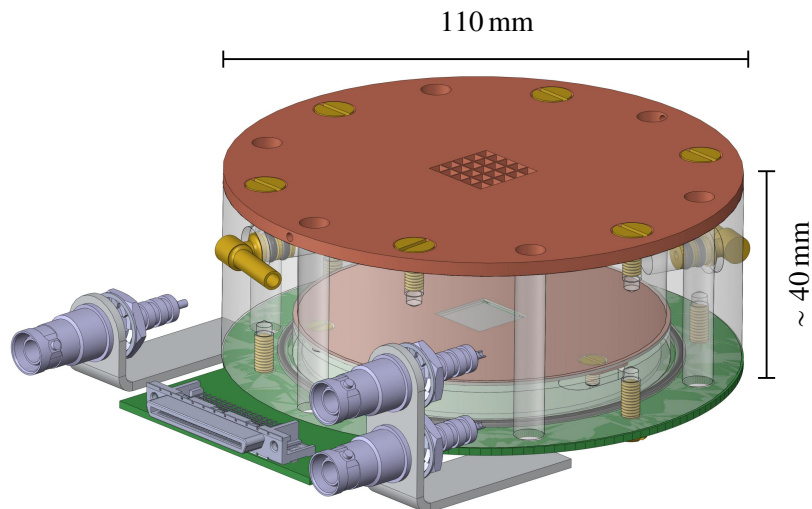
3D CAD model of the assembled InGrid based X-ray detector. An exploded view illustrating the assembly of the detector from its main building blocks can be found in Fig. 7.1. Cables and wires are not shown.
